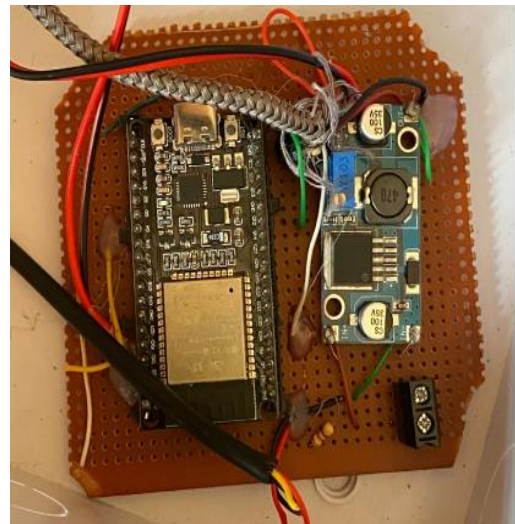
Assemble prototype (ESP32 and LM2595-ADJ)
